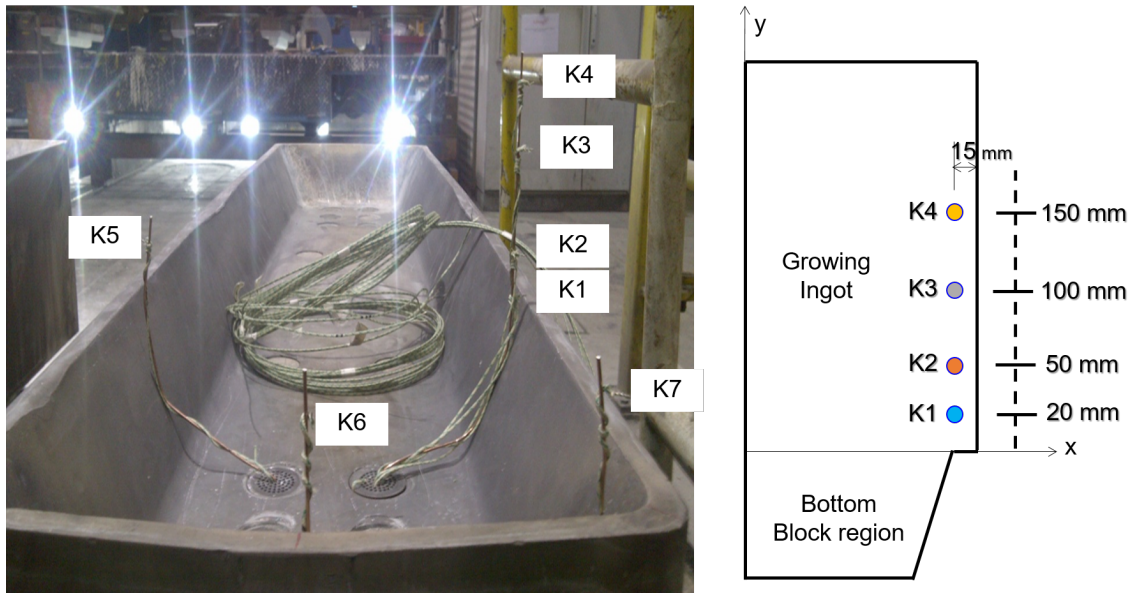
Bottom block and position of thermocouples during casting experiment.
